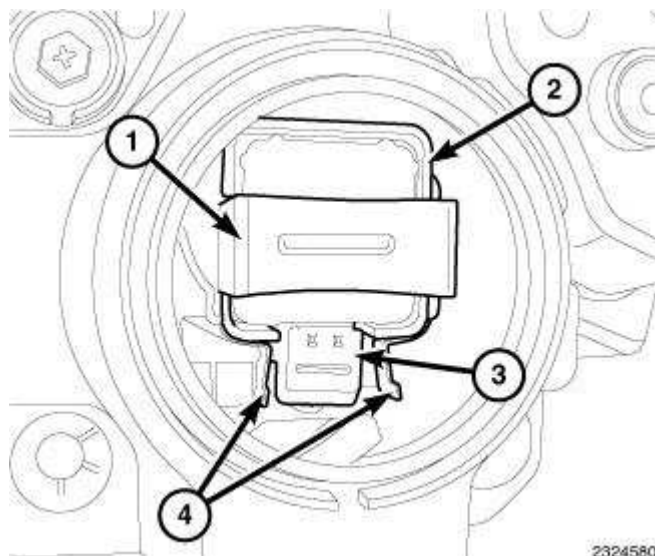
Identifying Spring Steel Igniter Retainer, Igniter Receptacle, High Tension Cable Connector & Tabs
